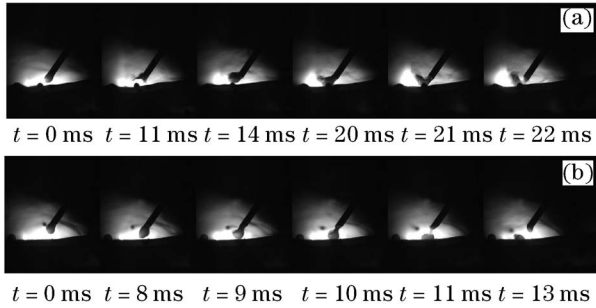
Droplet detachment of the hybrid welding with projected mode at different shielding gas pressures of 0.10 (a) and 0.15 MPa (b). $P = 1200$ W, $I = 150$ A, $D_{LA} = 2.0$ mm.
